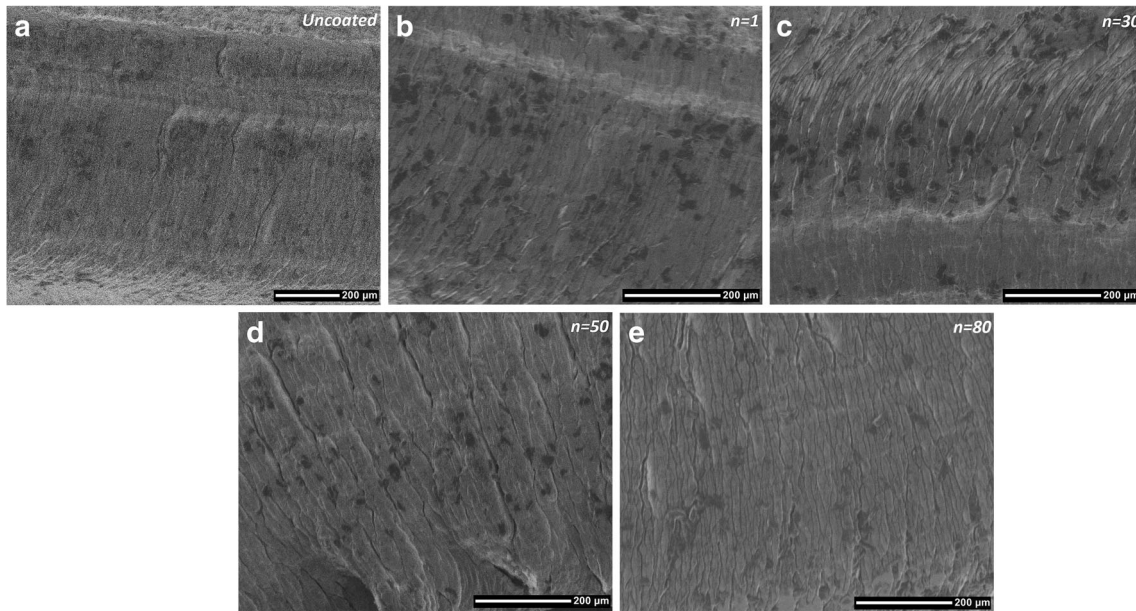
SEM micrographs (150×) of produced AISI 1020 steel chip underside using diverse cutting tools: a uncoated tool, coated tool with bilayer number b tool/[HfN/VN]₁, c tool/[HfN/VN]₃₀, d tool/[HfN/VN]₅₀, and e tool/[HfN/VN]₈₀
